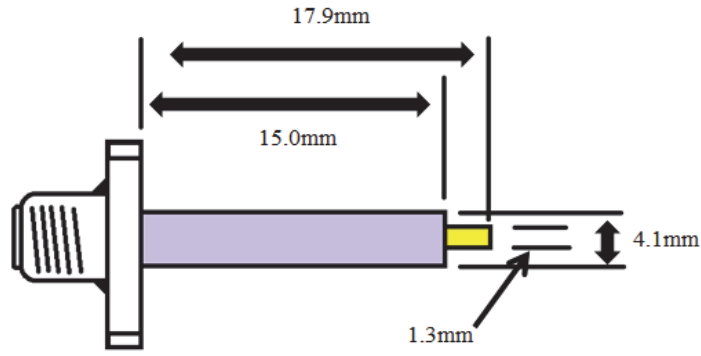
Typical Extended Insulation Flange Mount SMA Dimensions
